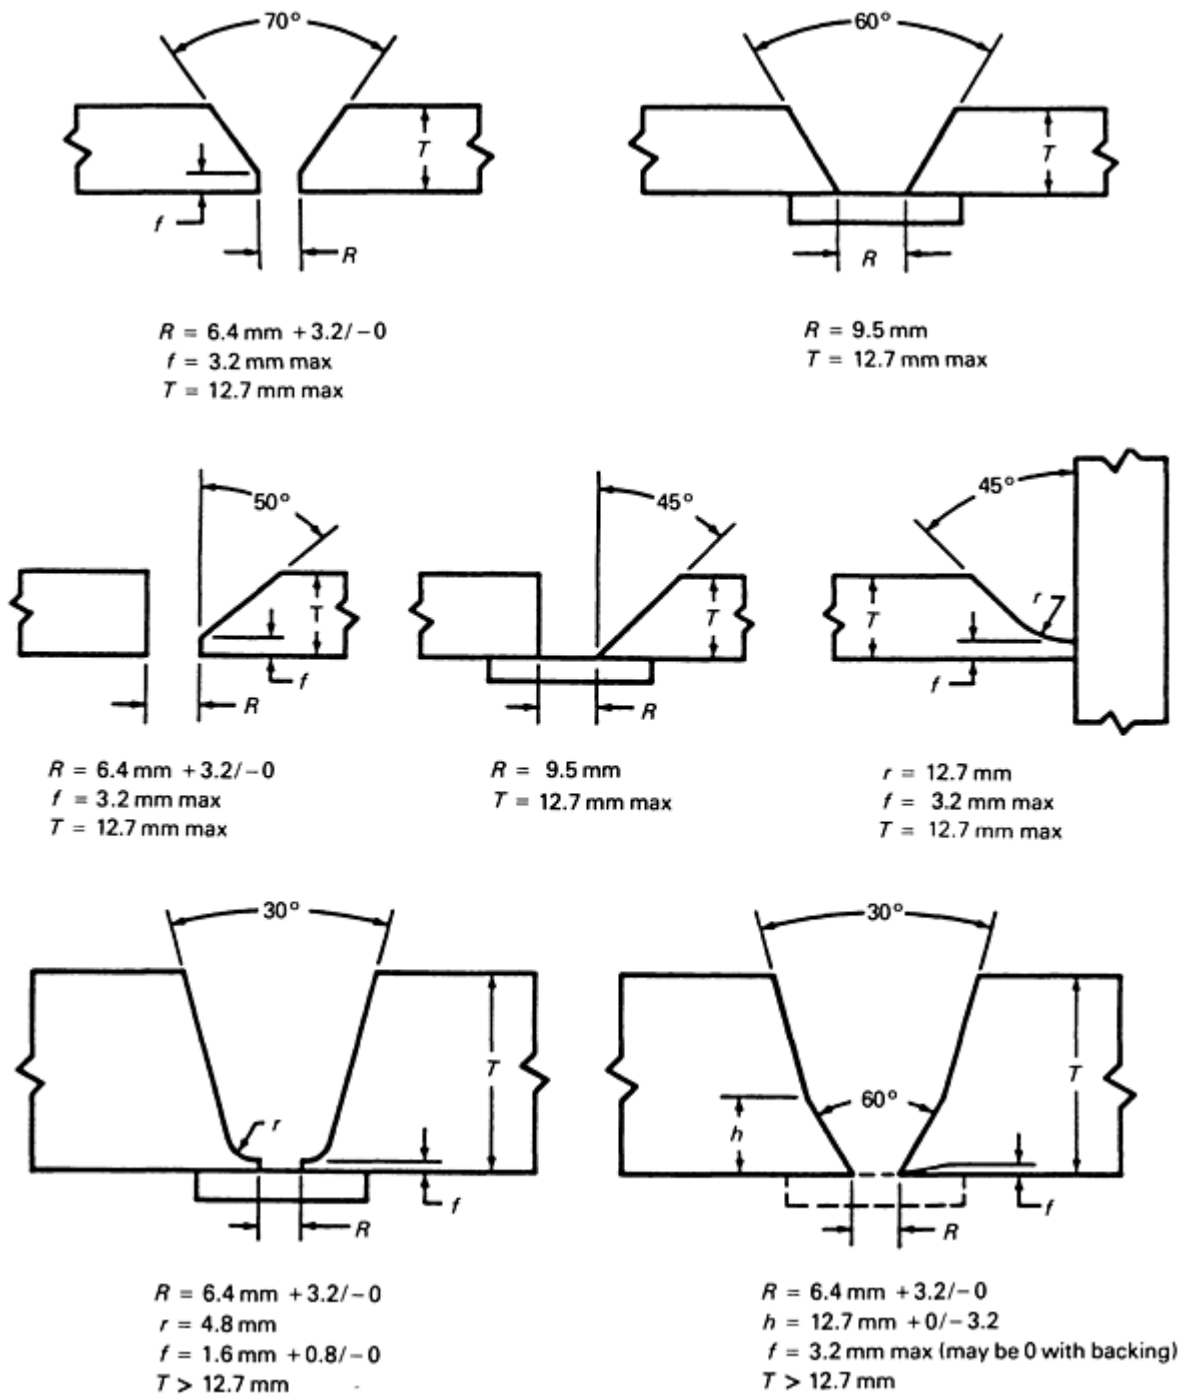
RECOMMENDED JOINT PREPARATION FOR WELDS USING SINGLE U OR V GROOVES. SOURCE: REF 1
